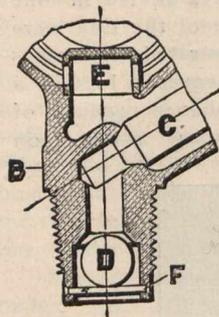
Detail Sectional View of Shank; Showing Ball Check D, and Baffling Cap E.
